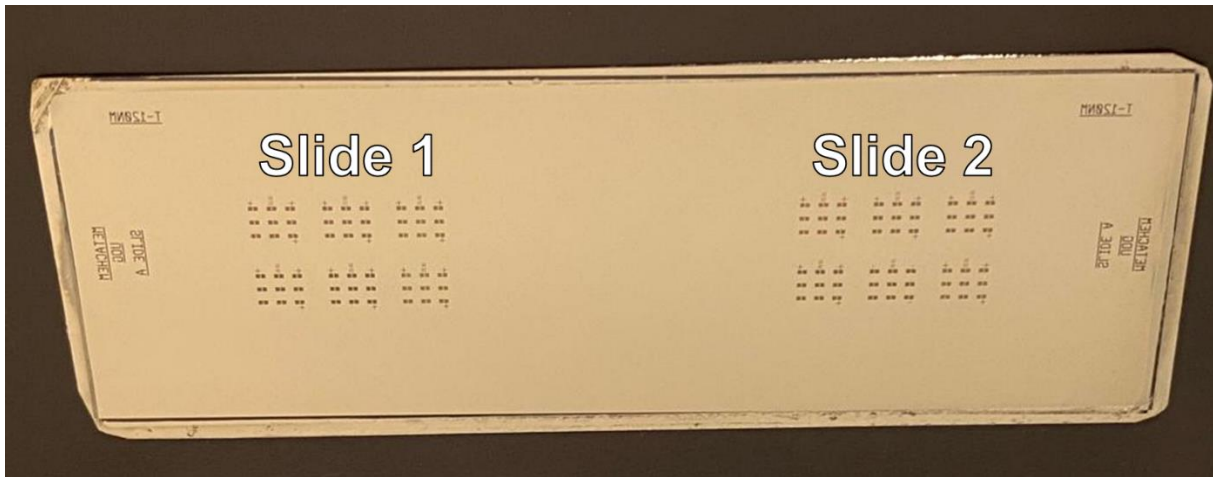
Nickel shim master used in injection moulding to generate polycarbonate DPA slides prior to gold coating.
